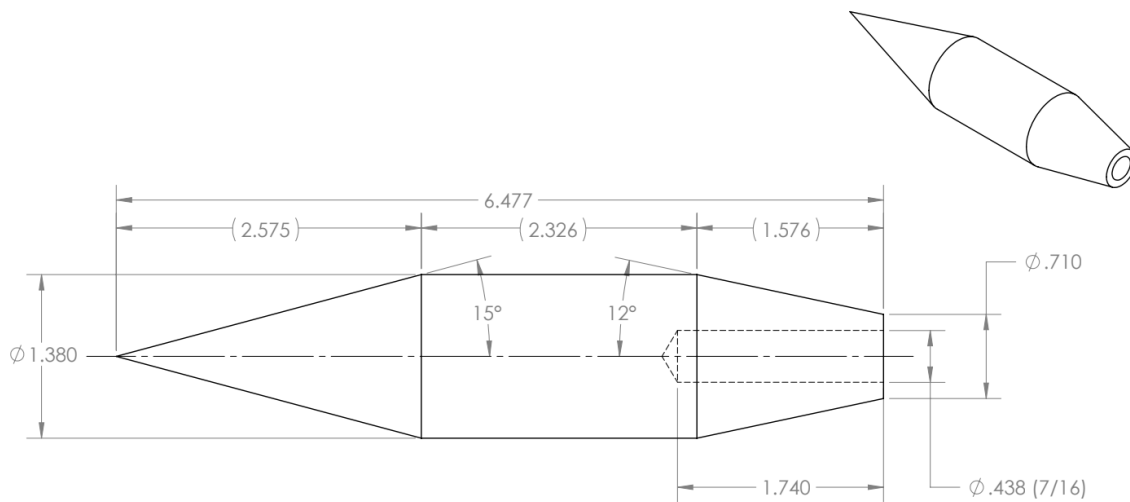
Drawing showing dimensions of P300 polycarbonate projectile. All dimensions in inches.
